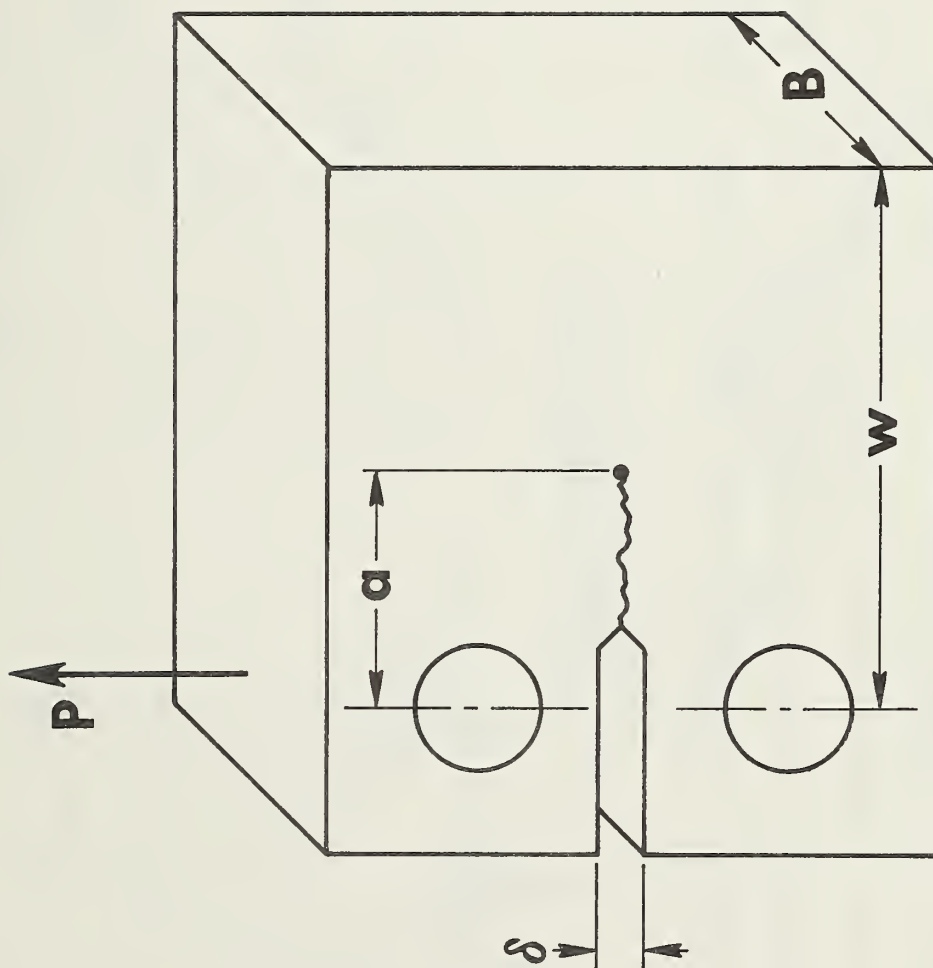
ASTM E-399 compact specimen for fracture toughness testing.
